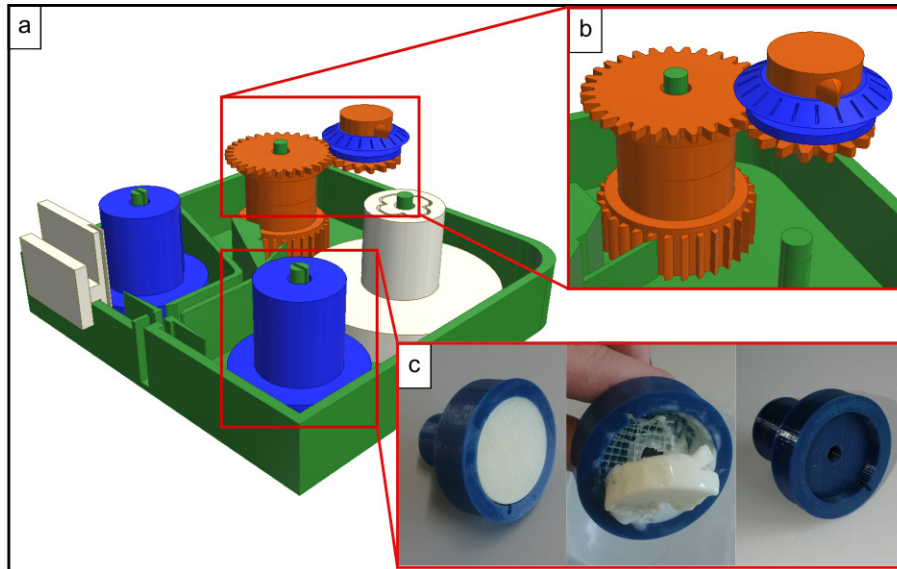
3D-CAD model of a dosing device draft using gear wheels to dose the packed ODF and spiral springs for motion of the packaging (a and b). 3D-printed waste roll (blue) with a water-soluble PVA support structure (white) before, after partly dissolution in water and after complete dissolution (c).
